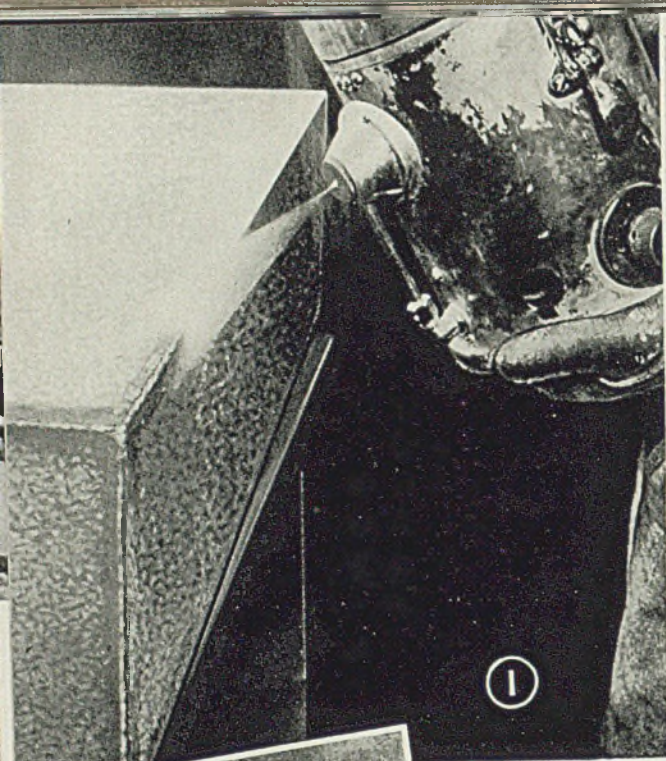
Spraying on a protective coating of lead-base alloy by means of a special device for handling this low-melting point material. This is a ready method for renewing the zinc coat on welded sheet metal constructions where the heat of welding has vaporized the original coating
